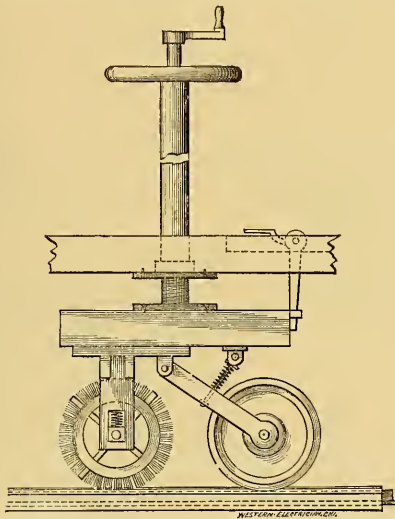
Irish's Sealed Conduit Electric Railway.
